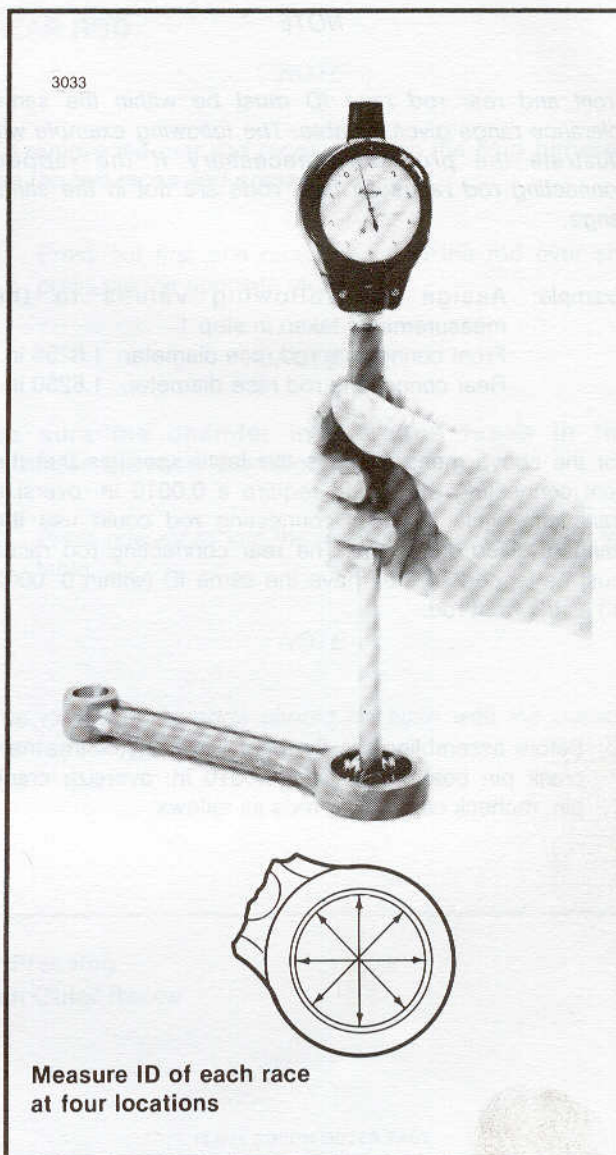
Measure Connecting Rod Race Inside Diameters
